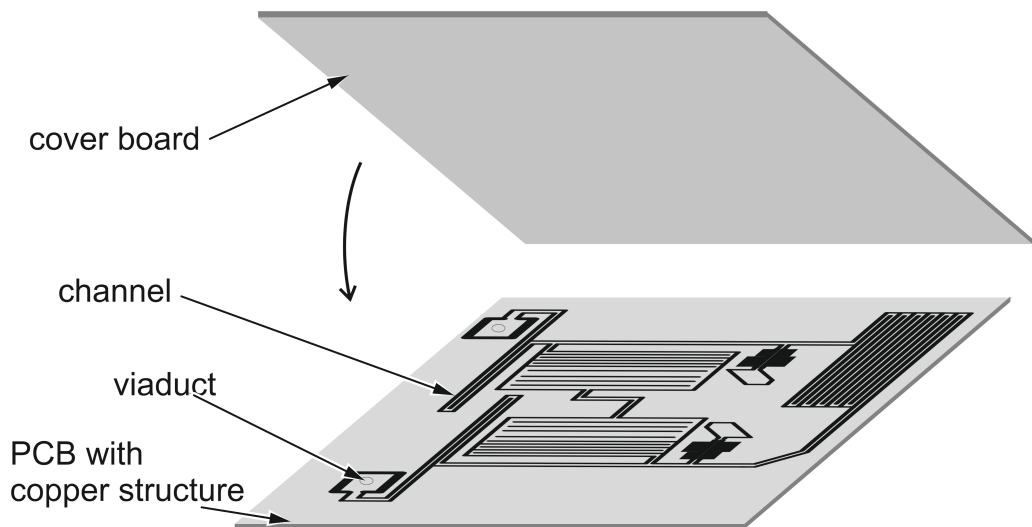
PCB based fluidic system of different elements in PCB technology (the cover board is shown lifted up) [115].
